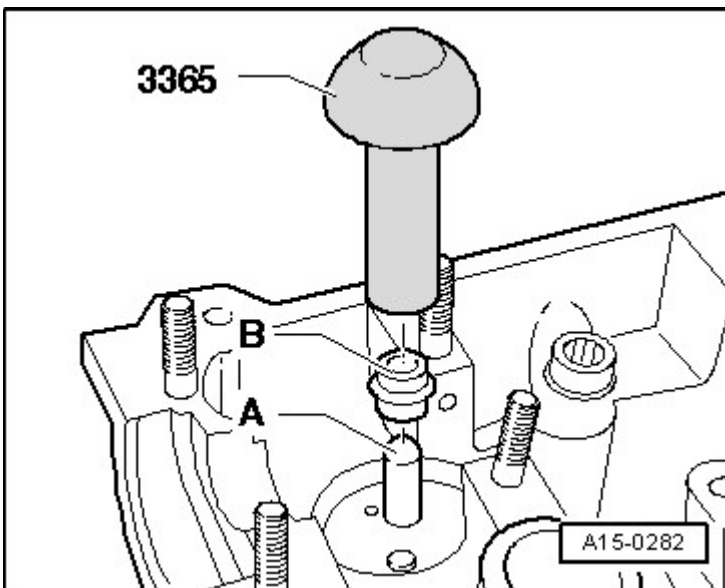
Identifying Plastic Sleeve, New Valve Stem Oil Seals & Valve Stem Seal Driver 3365
